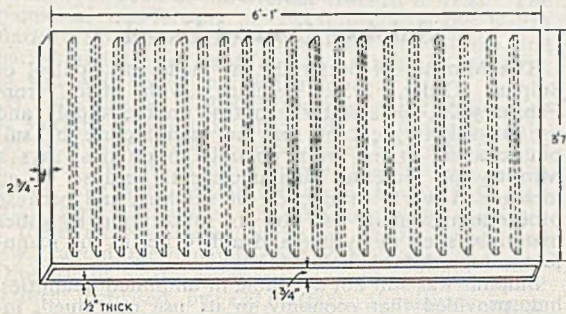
Hollow Cooling-table Casting, the Making of which is Described.
